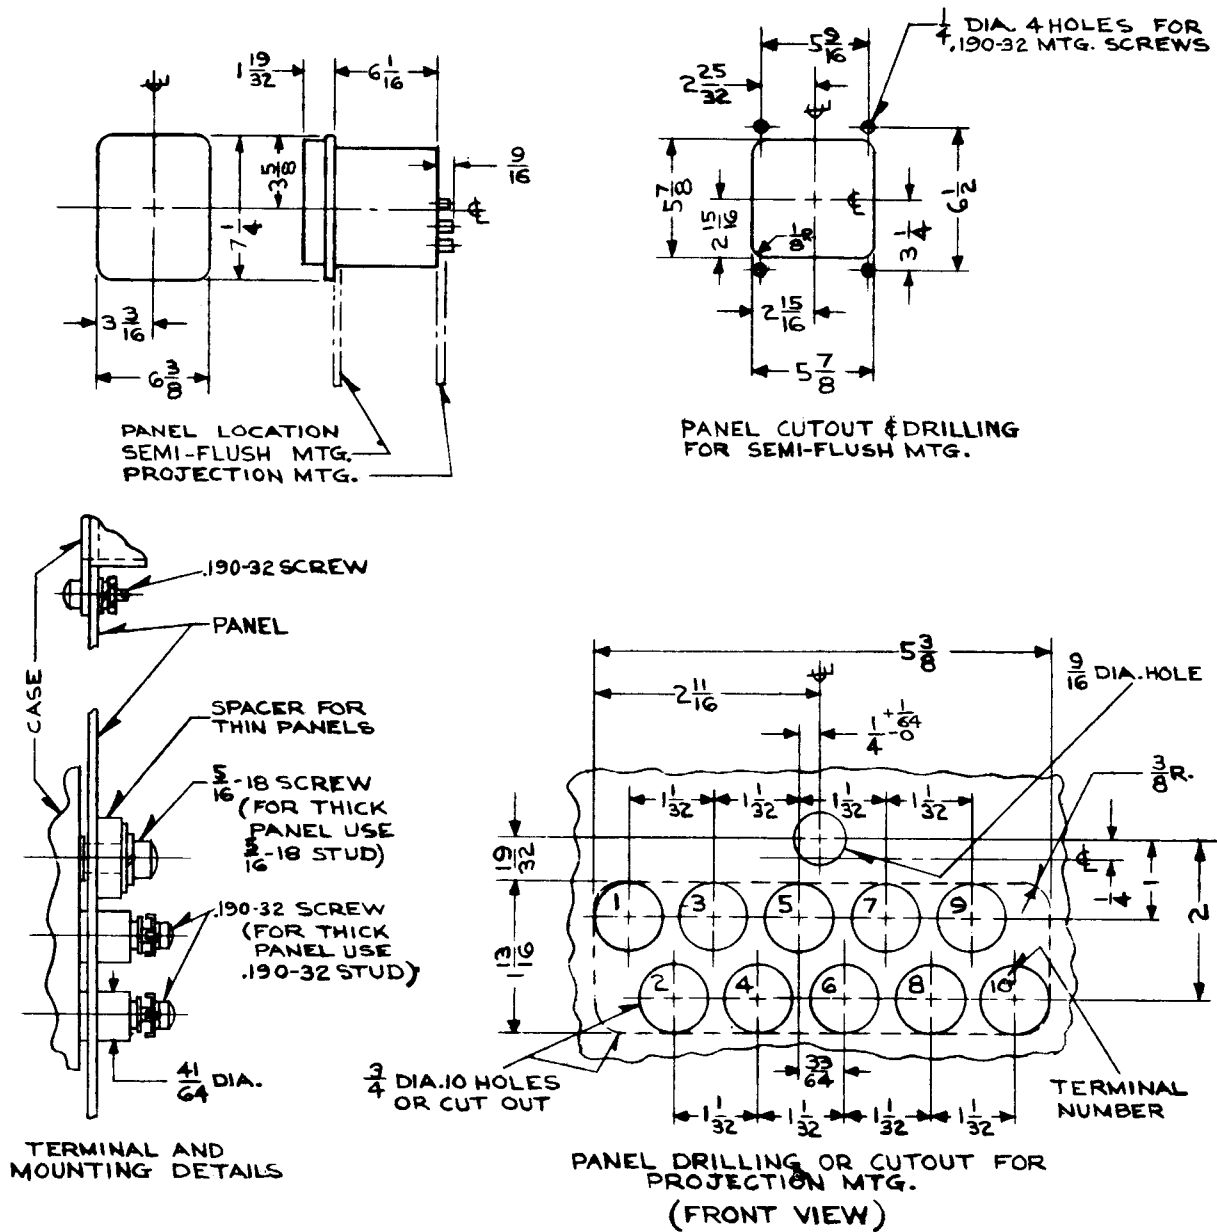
Outline & Drilling Plan for External Remote Trip Resistor Assembly.
